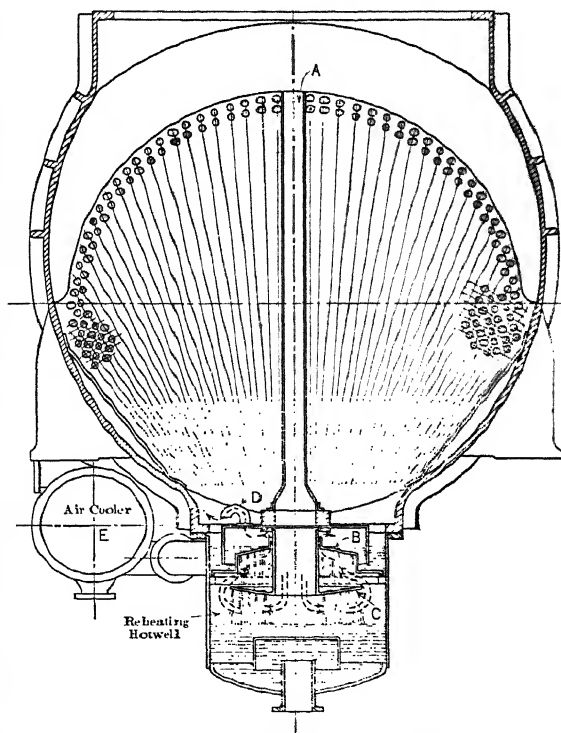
Cross Section of Foster-Wheeler Single Pass Surface Condenser with Reheating Hotwell and External Air Cooler
